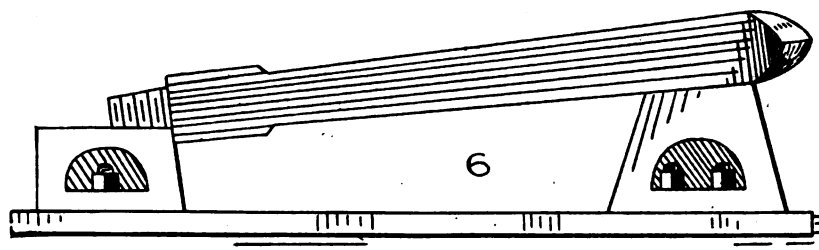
A CONVENIENT WAY OF HANDLING A DRILLING BIT IN PROCESS OF FORGING.
